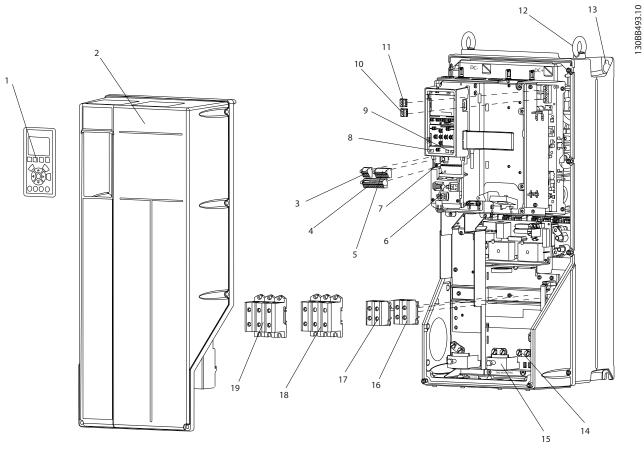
Exploded View B and C Sizes, IP55/66
